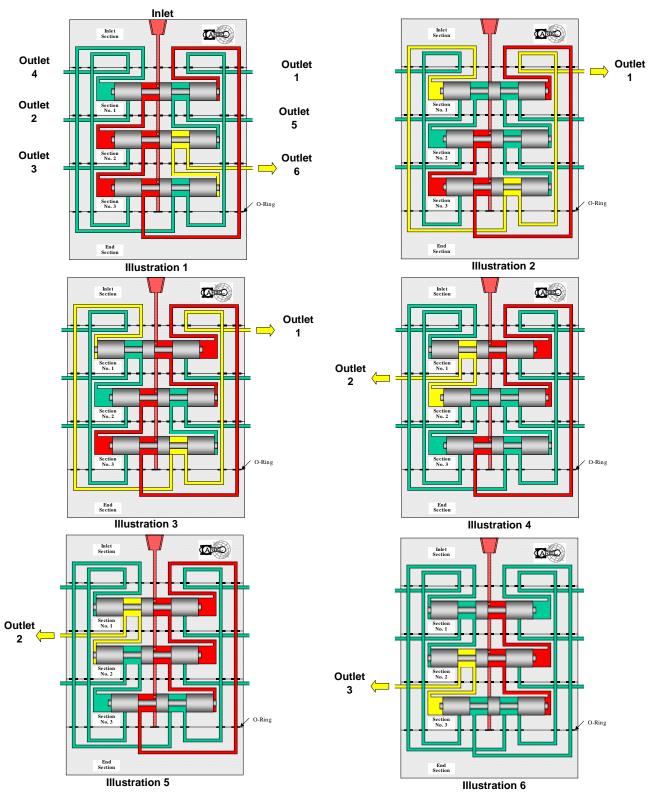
DIVIDER VALVE OPERATION SCHEMATIC - 1 THROUGH 6
